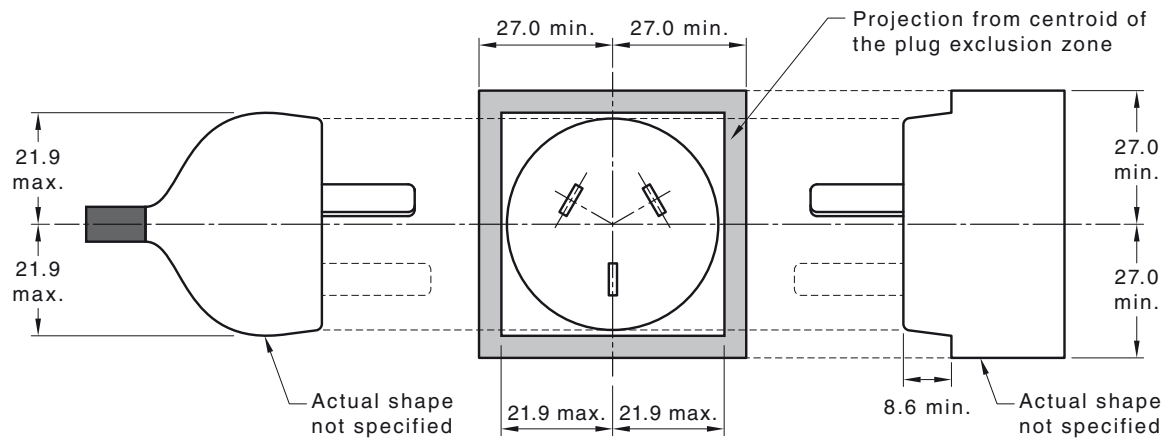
(in part) DIMENSIONS OF PLUGS
